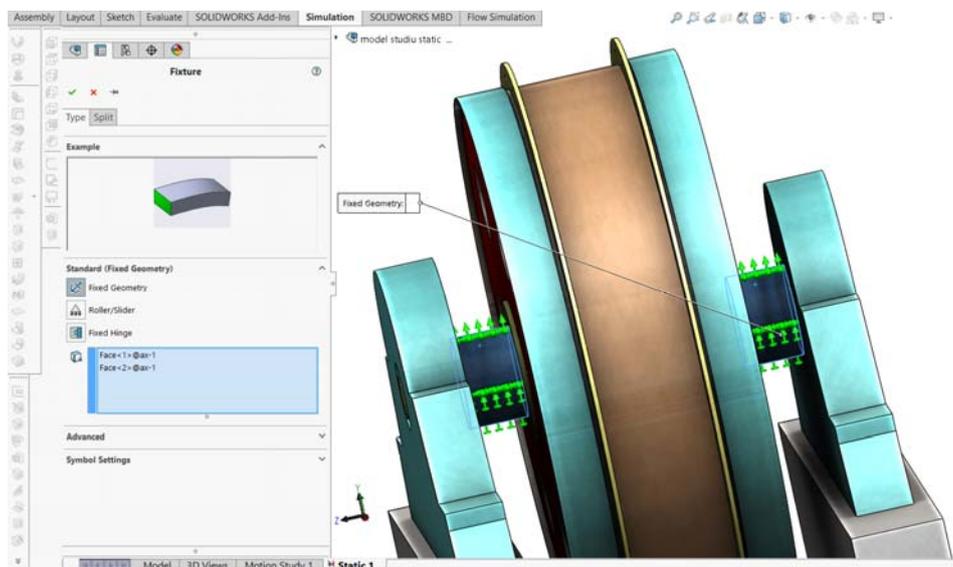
Setting the surface of the rotation shaft as Fixed Geometry
